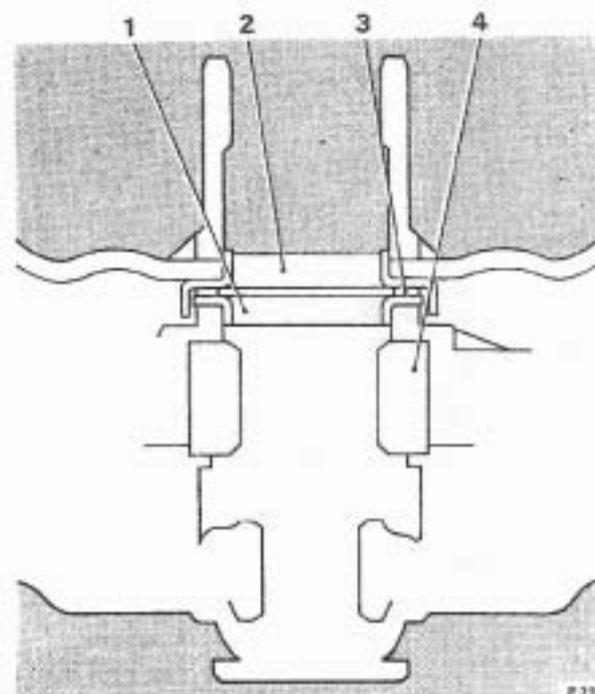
TORQUE CONVERTER—INTERNAL BEARING ARRANGEMENTS
